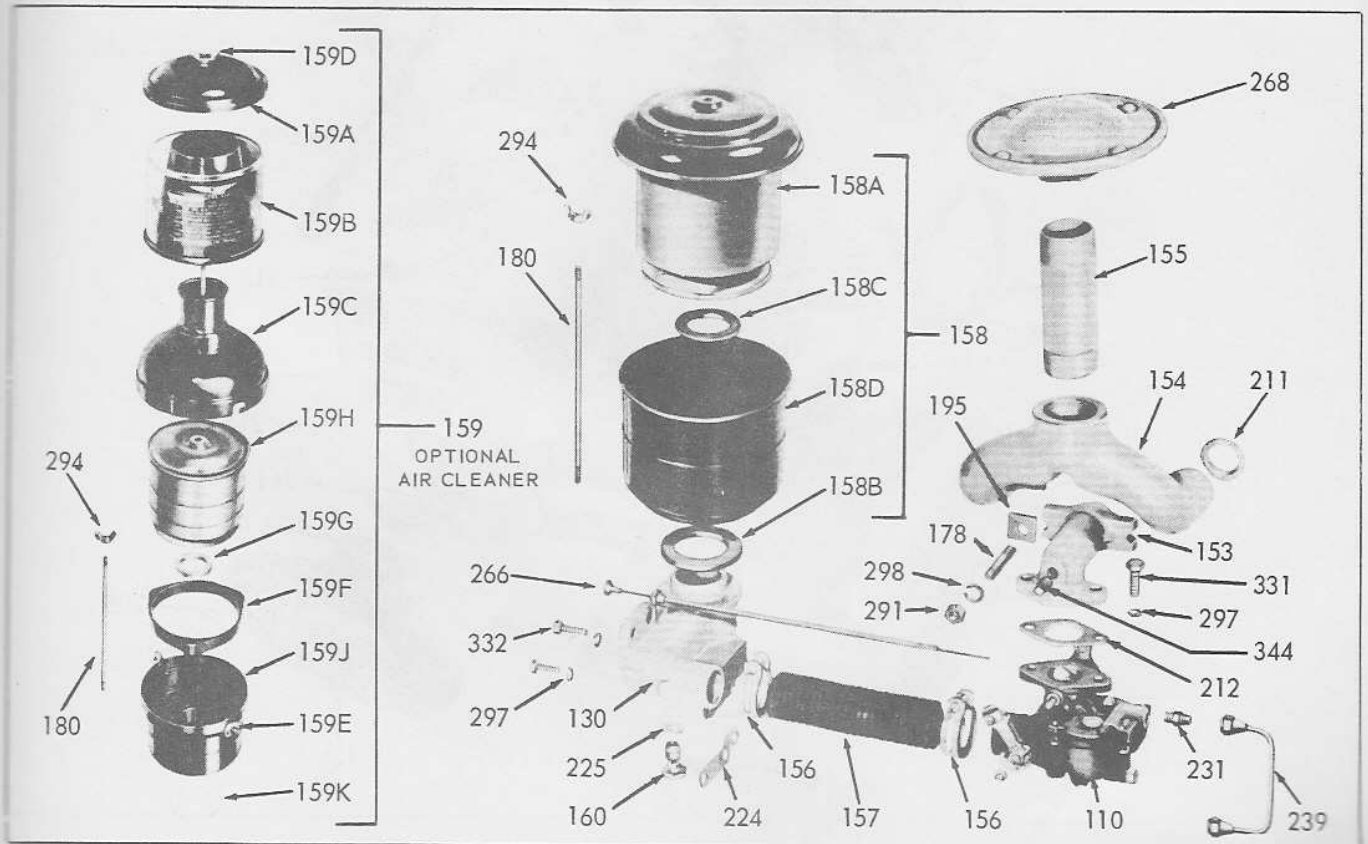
, CARBURETOR, MANIFOLD AND AIR CLEANER GROUP
